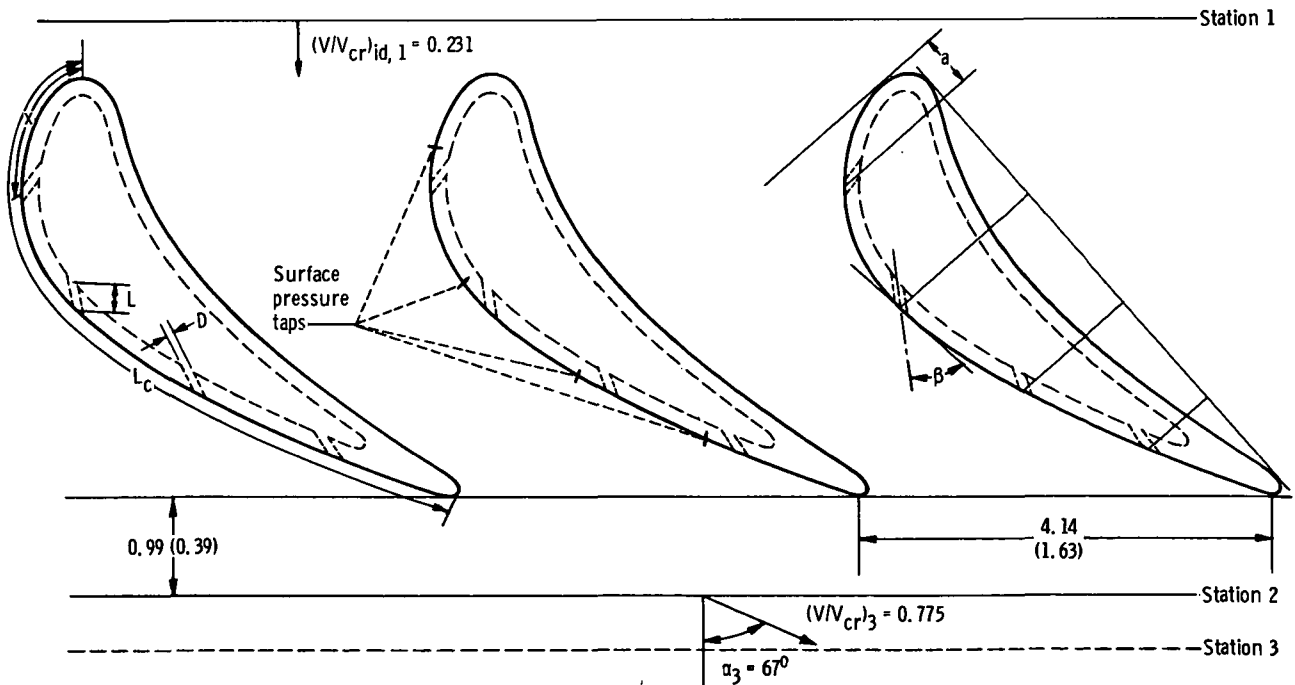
Stator blade geometry. All dimensions are in cm (in.).
